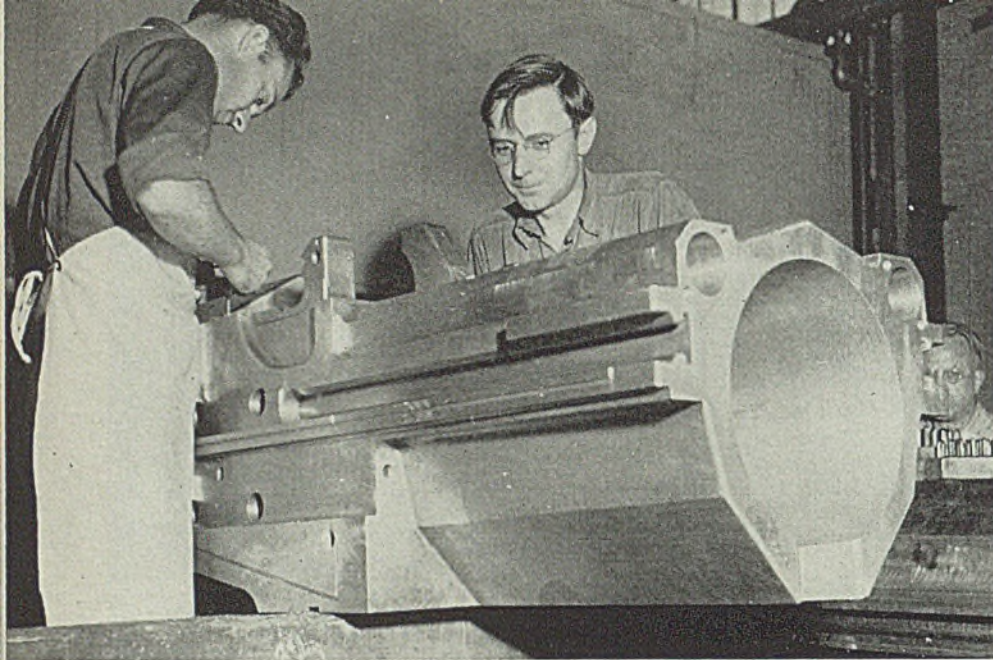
Bench workers finishing a breech housing for a medium caliber gun. O.E.M. photo by Palmer
